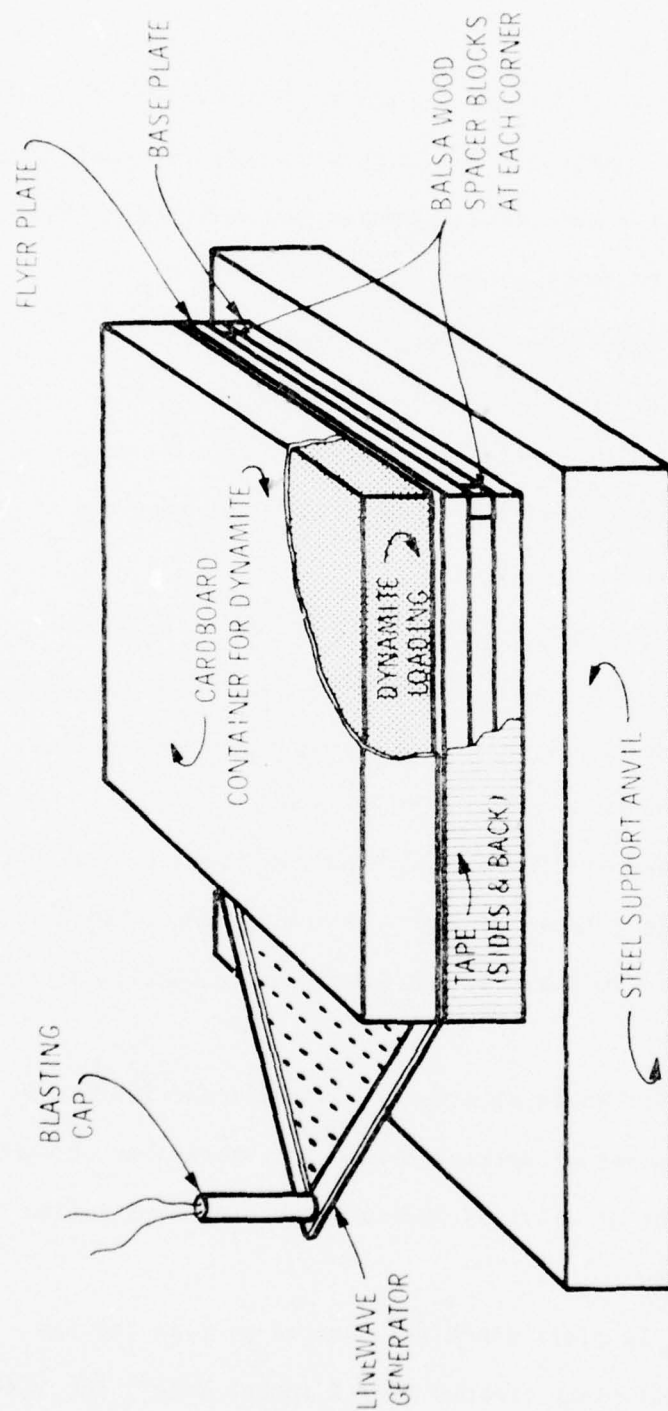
Component Configuration for Parallel Geometry Welding
